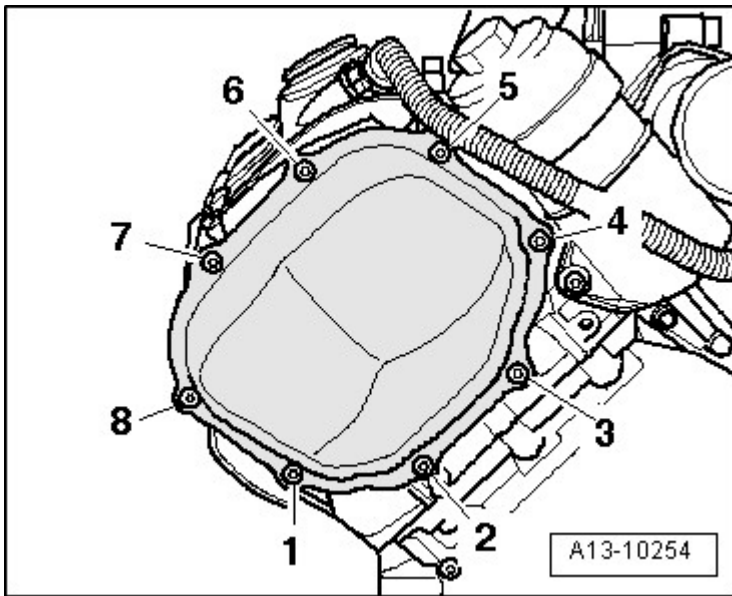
Left Timing Chain Cover Bolt Tightening Sequence & Specification
